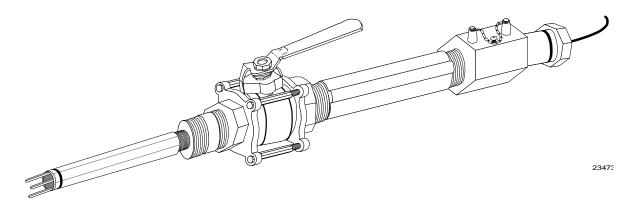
7774 Stainless Steel Insertion/Removal Assembly
